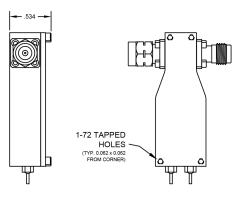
HL9647 with DC bias pins Mechanical Drawing
